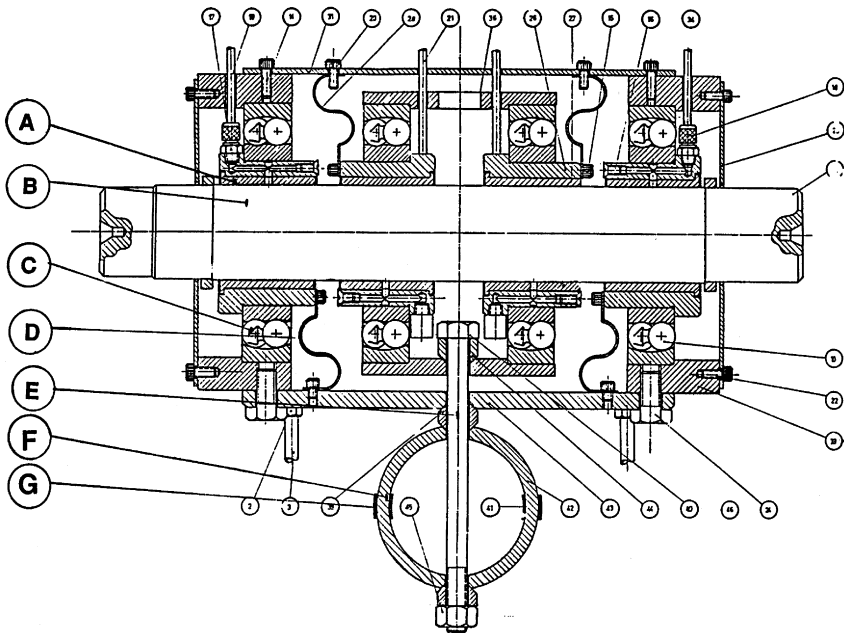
Friction-testing machine with self-alignment arrangement.
